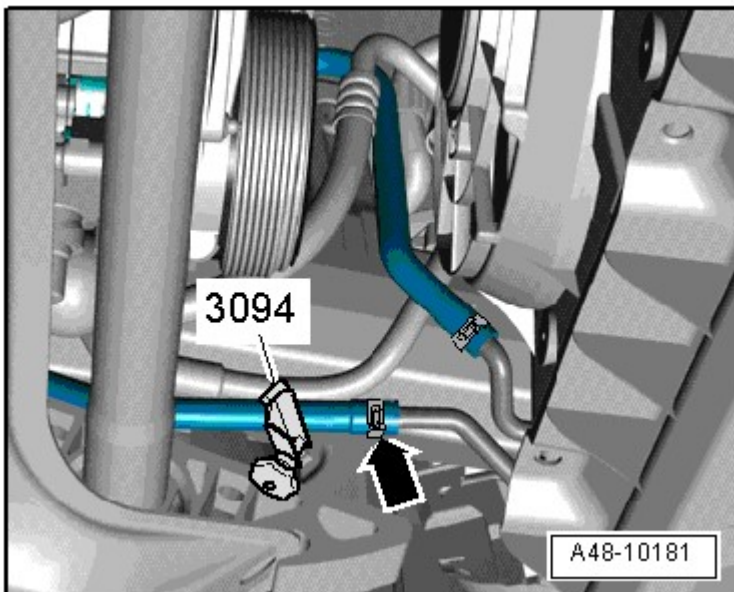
Identifying Lock Carrier On Left Hydraulic Line -Arrow- To Left Power Steering Pump Cooler
